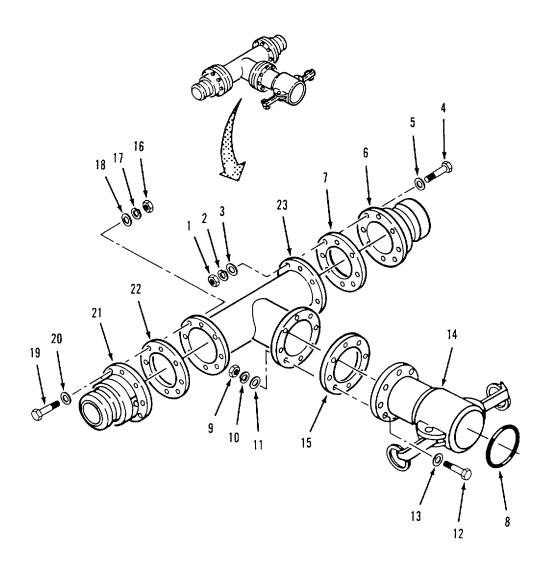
Tee Assembly (9112-Y4) Assembly.
